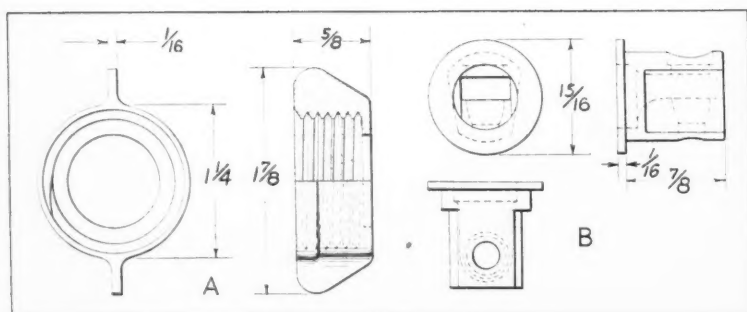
Parts Produced in Dies Shown in Figs. 4 and 5
